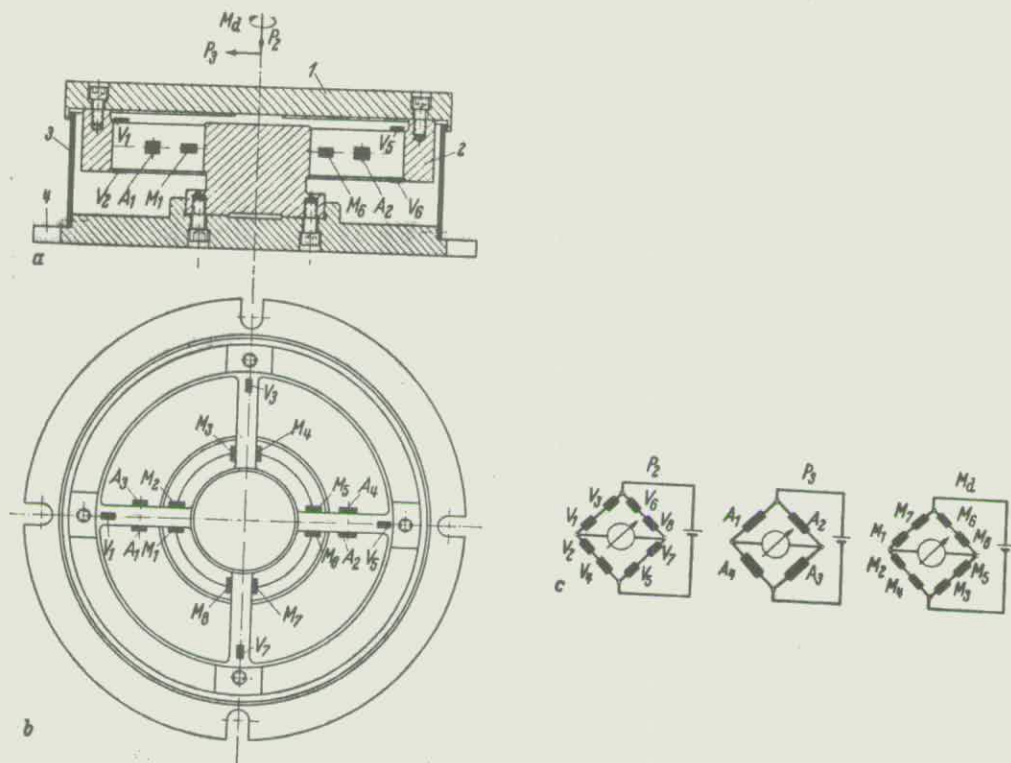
Three-component dynamometer which is able to measure thrust, torque and radial forces
